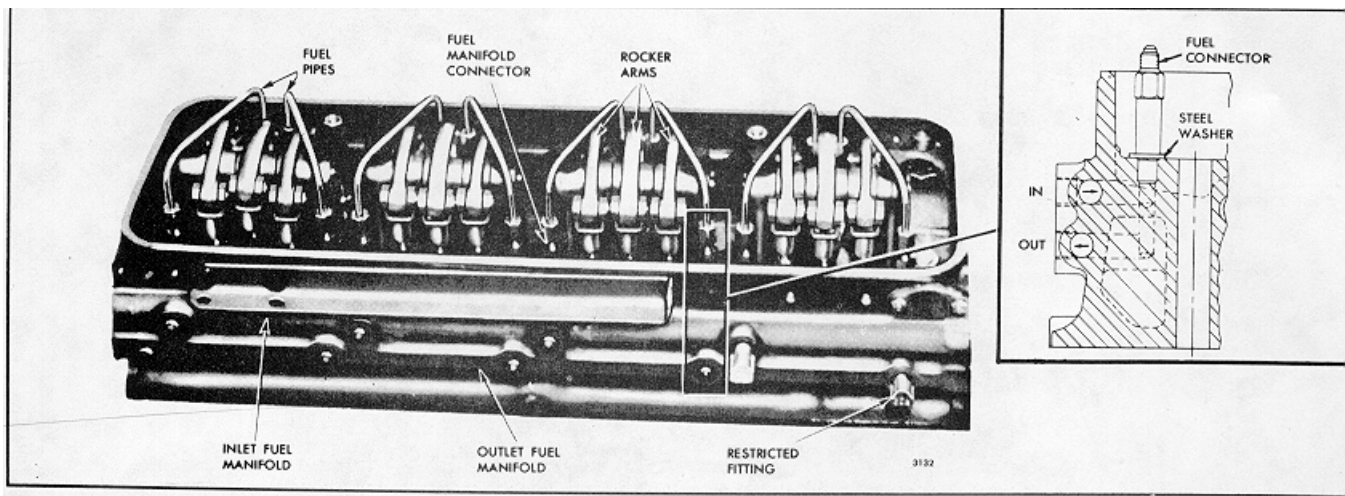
Cylinder Head with Integral Fuel Manifolds
